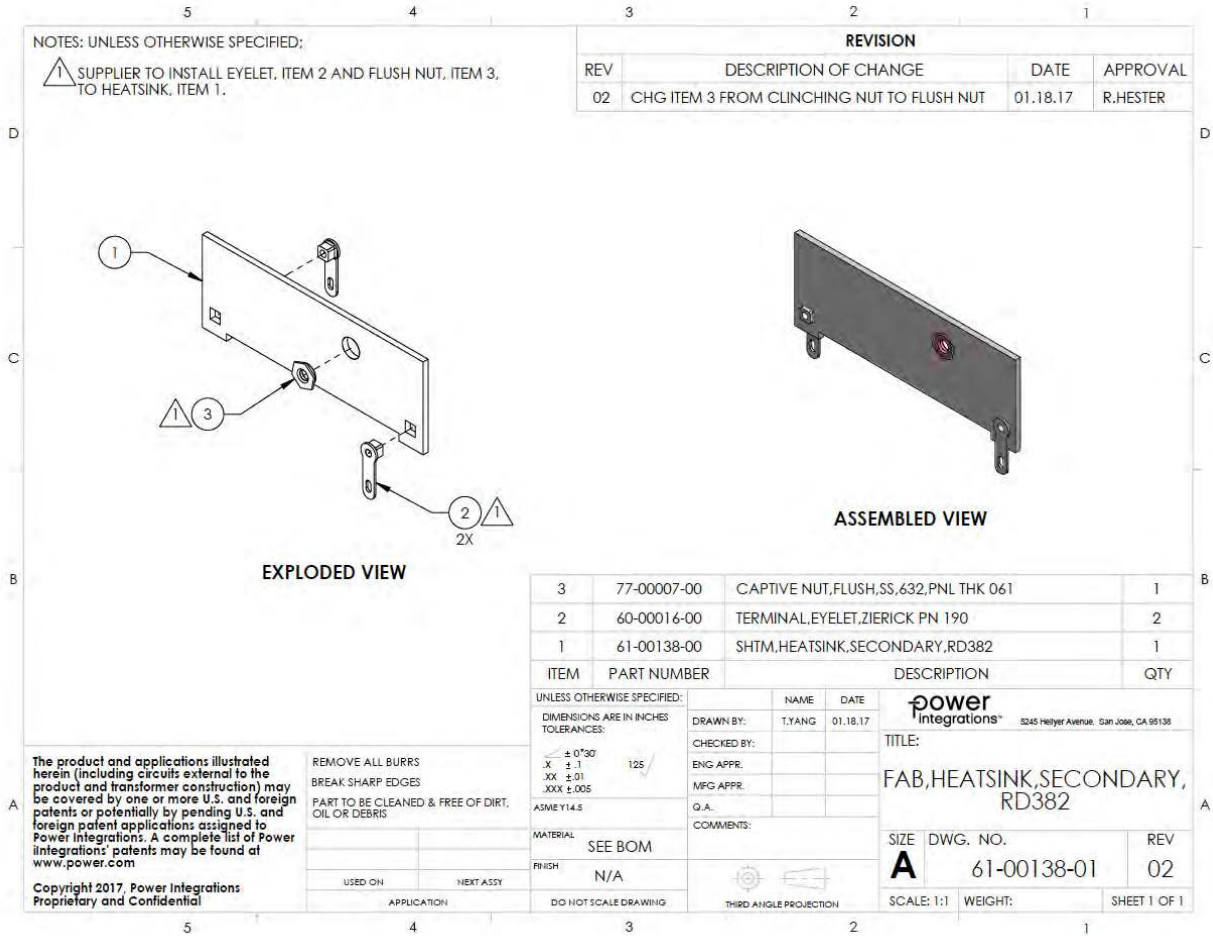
Finished Secondary Heat Sink with Installed Fasteners.
